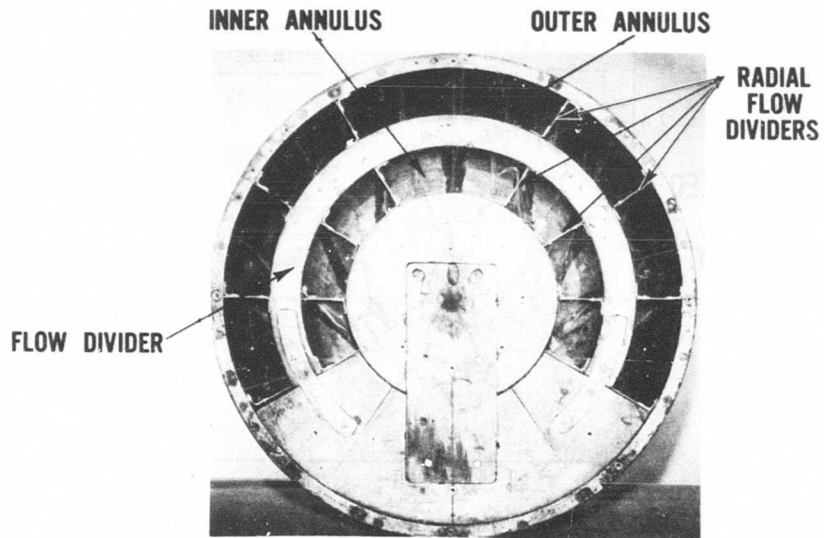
Turbine-to-Regenerator Test Duct Assembly Exit
